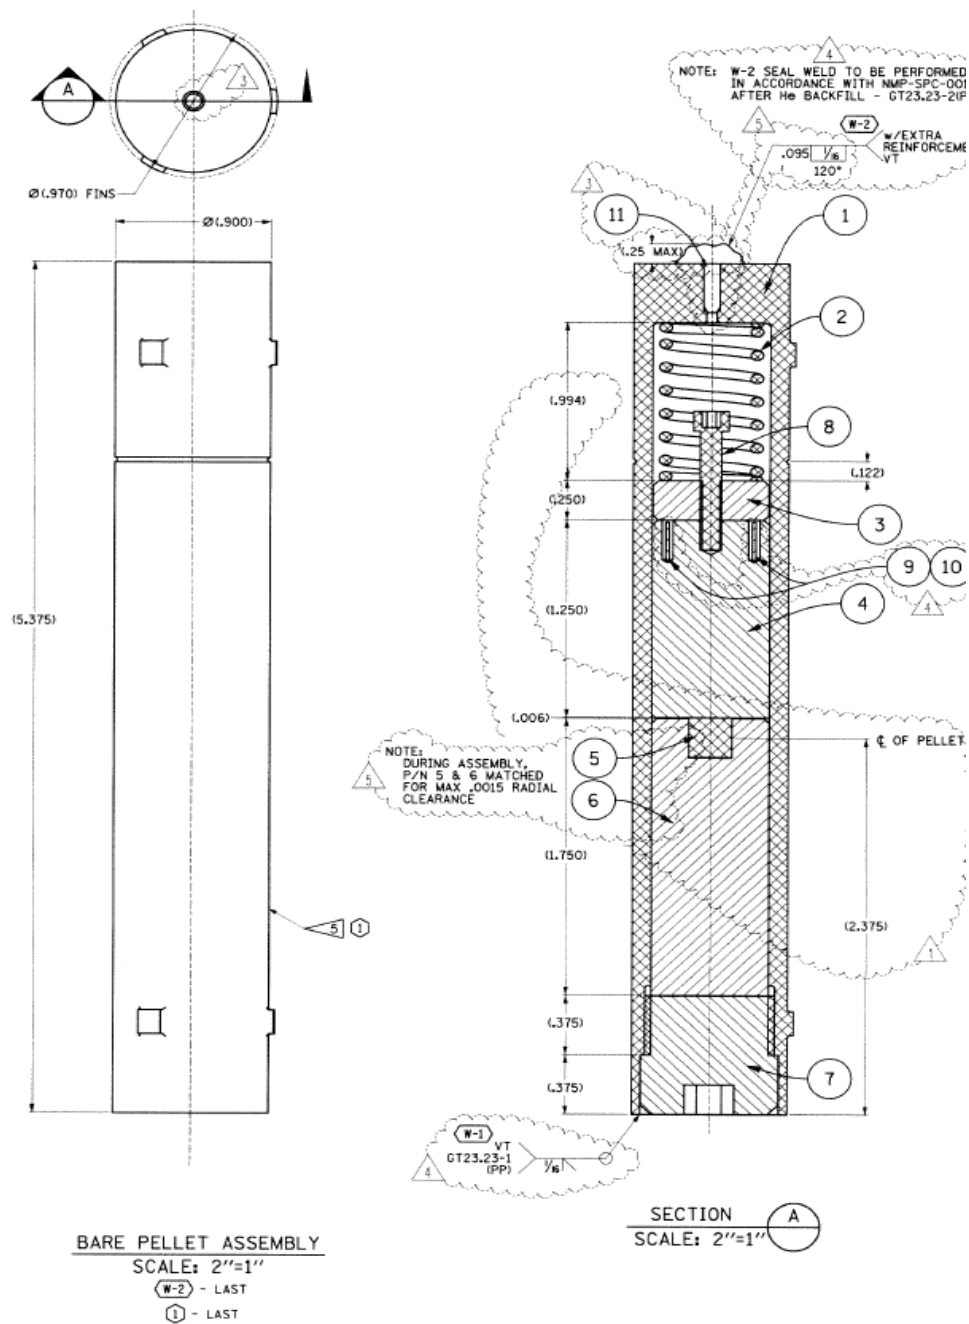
Robust single pellet capsule for initial testing. Item 5 is the pellet, 6 is the aluminum mount, and 4 is the copper heat sink.
